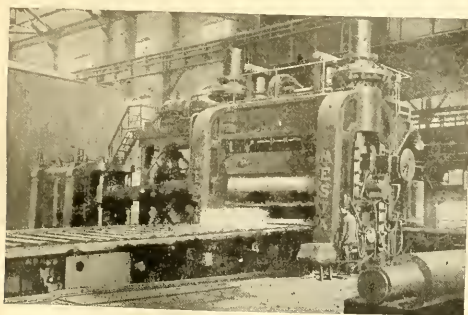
160 INCH THREE HIGH LAUTH-TYPE PLATE MILL
